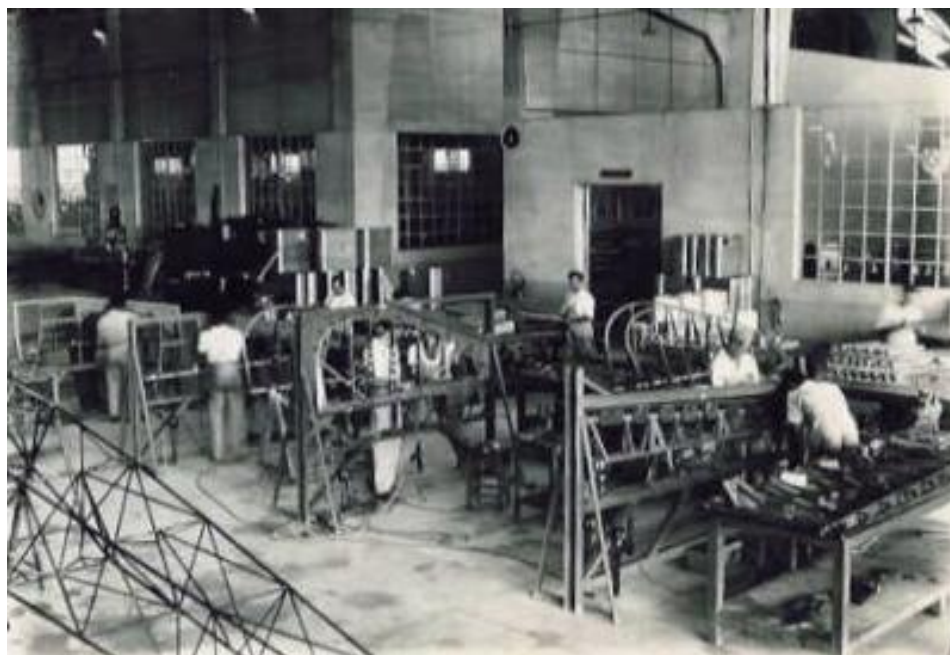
manufacturing of 3FG aircraft components at Fábrica do Galeão.
